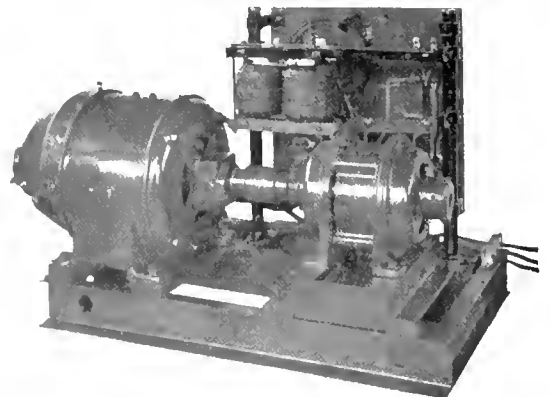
200-ampere Arc Welding Set (Back View)
